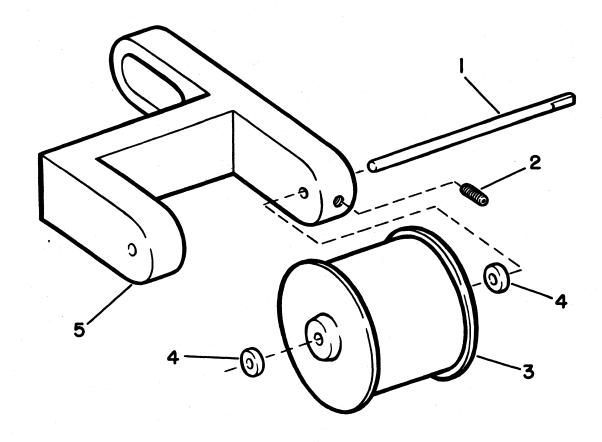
, 500 073 00 LOW INERTIA IDLER ASSEMBLY-EXPLODED VIEW
